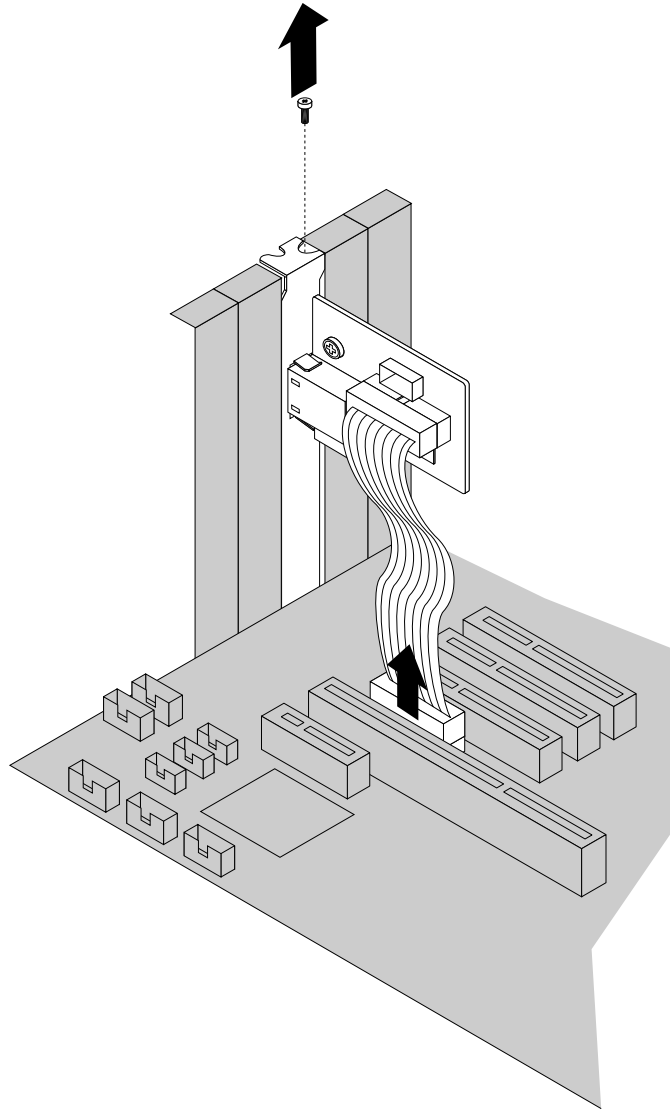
Disconnecting the ribbon cable and removing the slot bracket with RMM3
